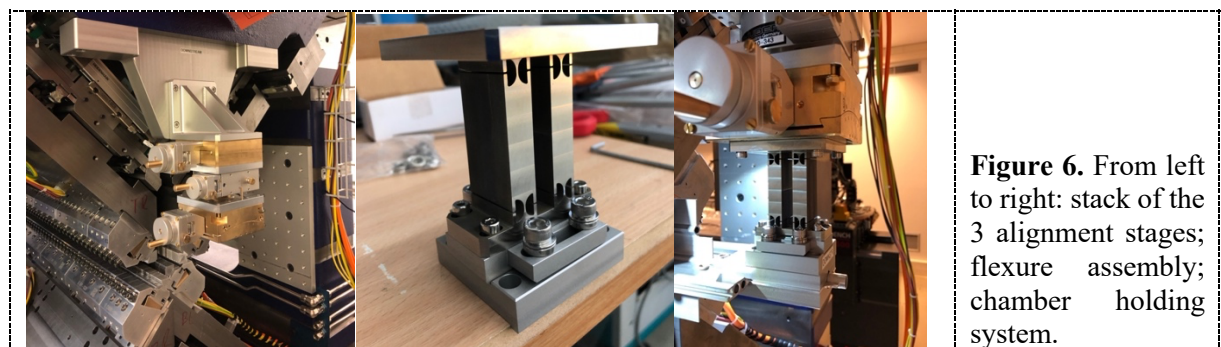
From left to right: stack of the 3 alignment stages; flexure assembly; chamber holding system.
